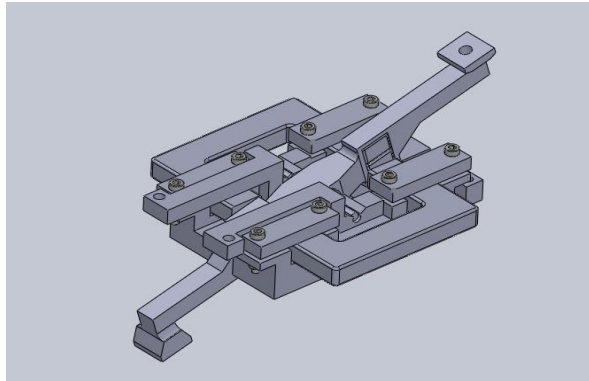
SolidWorks Assembly “2022 Motor Assembly 1.01”
